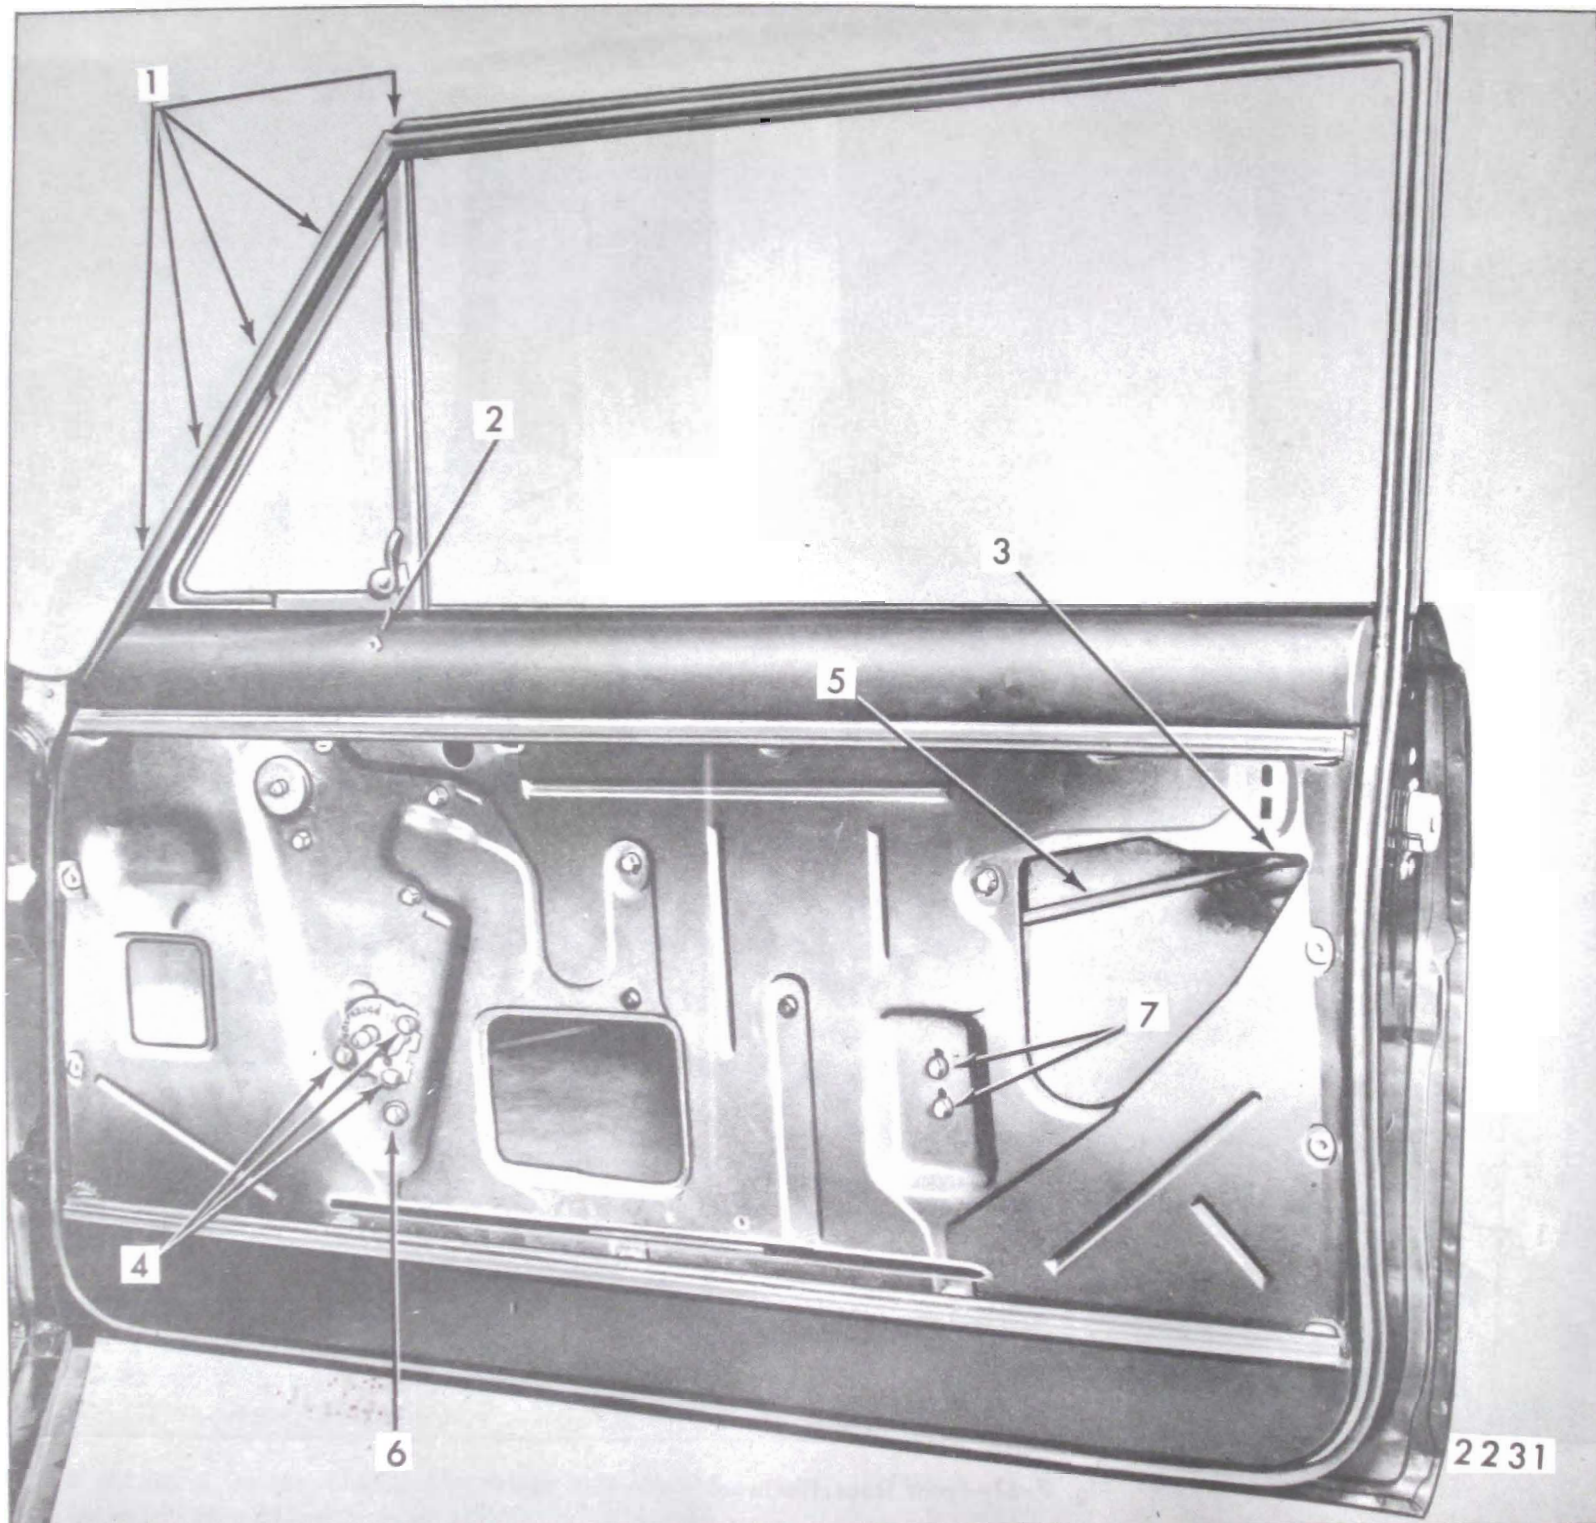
Front Door Hardware Attachment - "X" Styles
